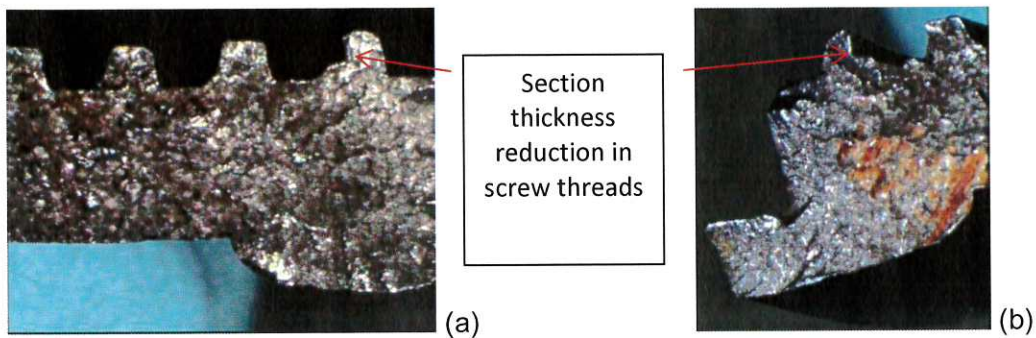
(a) Fracture surfaces of the front section of the receiver, and (b) fracture surfaces on the bolt face edge (note the discolouration on the bolt and the bolt face).
